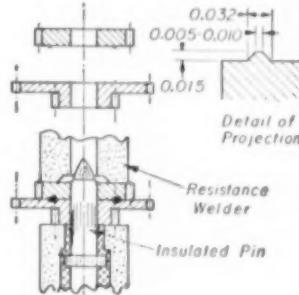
Assembly Fixture and Details of Projection Welds on Powder Metal Parts
